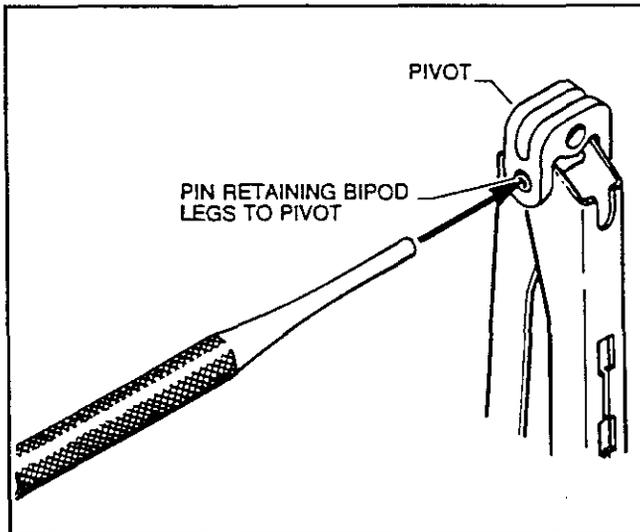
DISASSEMBLY OF BIPOD LEGS (CONT)
